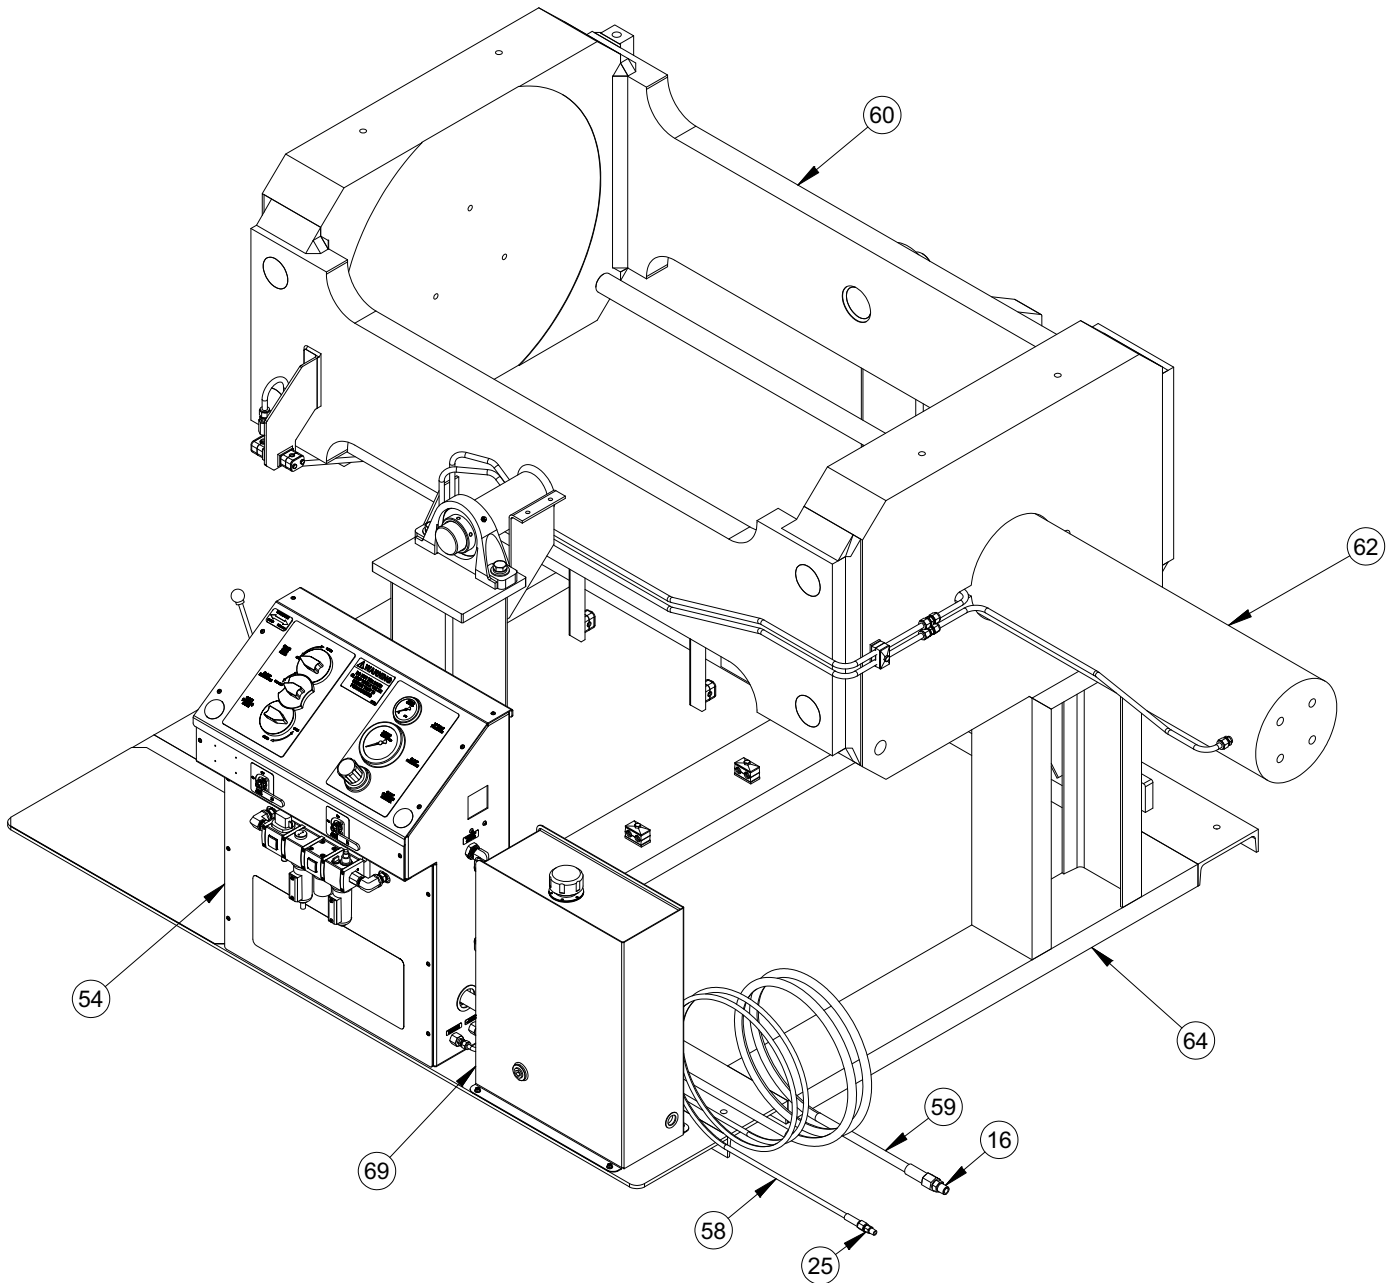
USV-24-300T ASSEMBLY 1 (P/N 89889)
